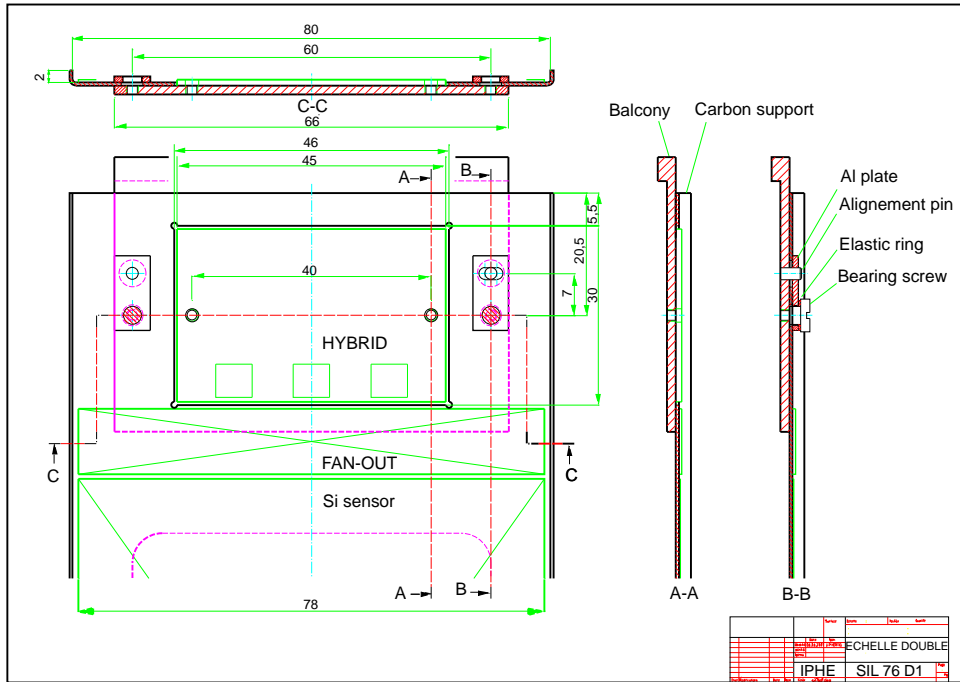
Technical drawing of the end section of the prototype ladder support.
